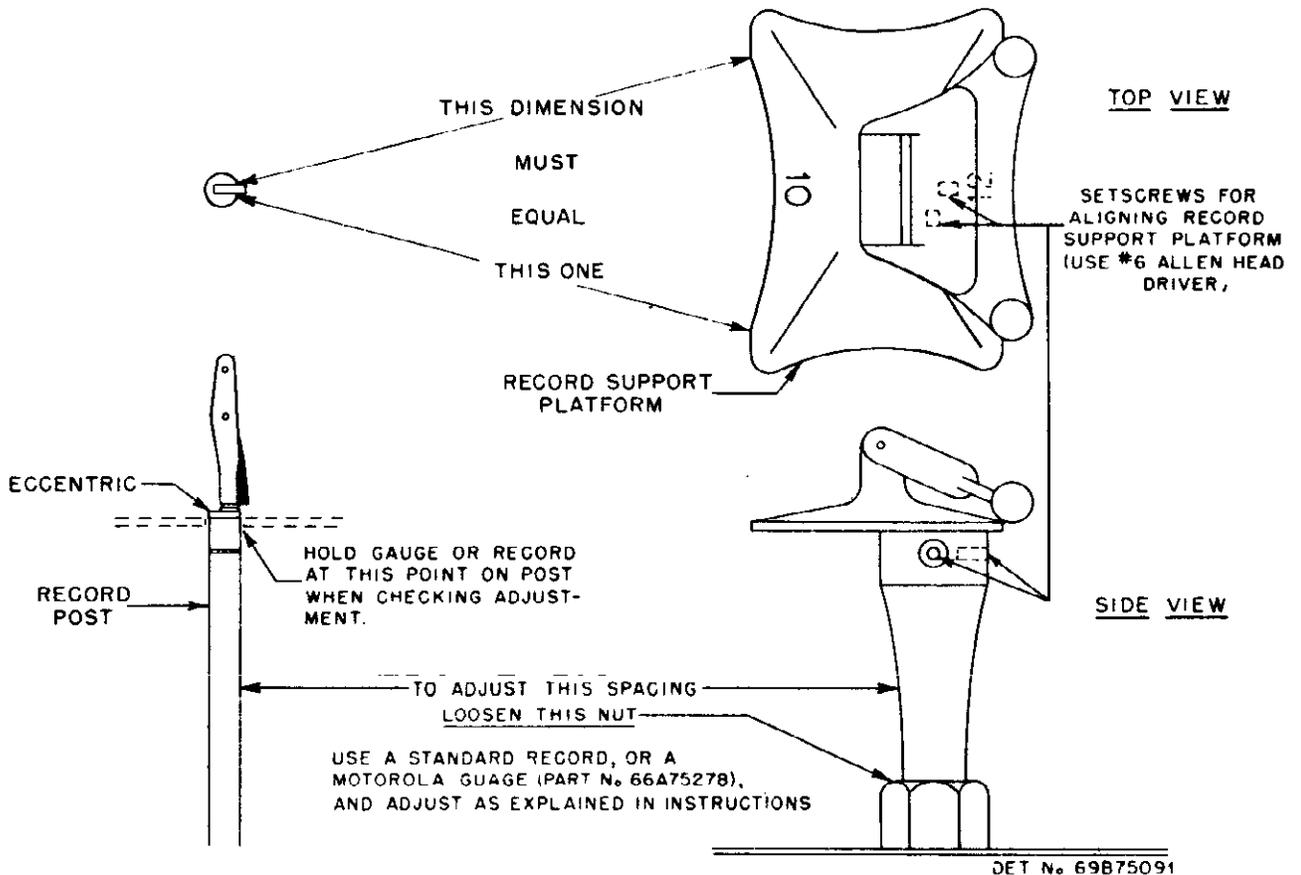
RECORD SUPPORT PLATFORM ADJUSTMENT DETAIL
